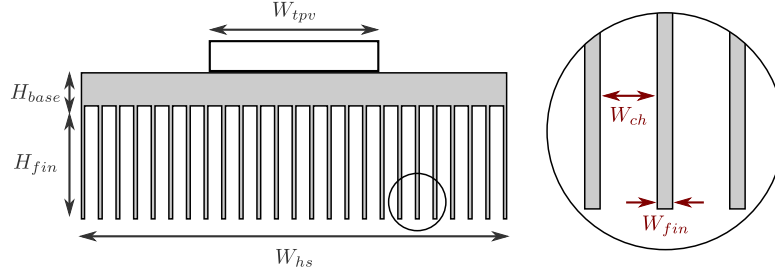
The geometry of the heat sink. Dimensions to be optimized are shown in red.
